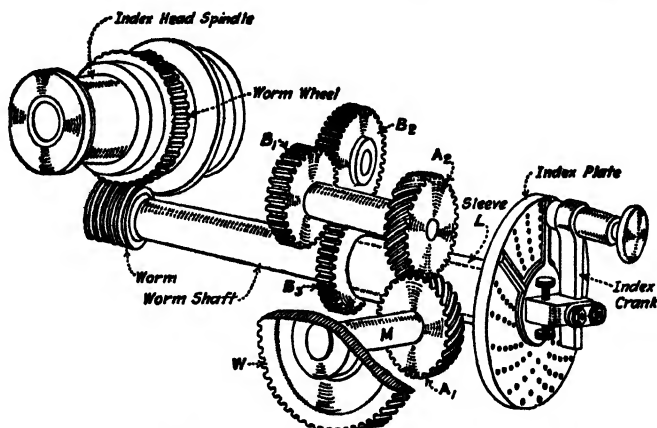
Spiral-head gearing (Brown & Sharpe). Motion transmitted from W through M to A_1 to A_2 to B_1 and B_2 (idler) to B_2 , through sleeve L to index plate to index crank to worm shaft, worm, worm wheel, spindle, and work.
